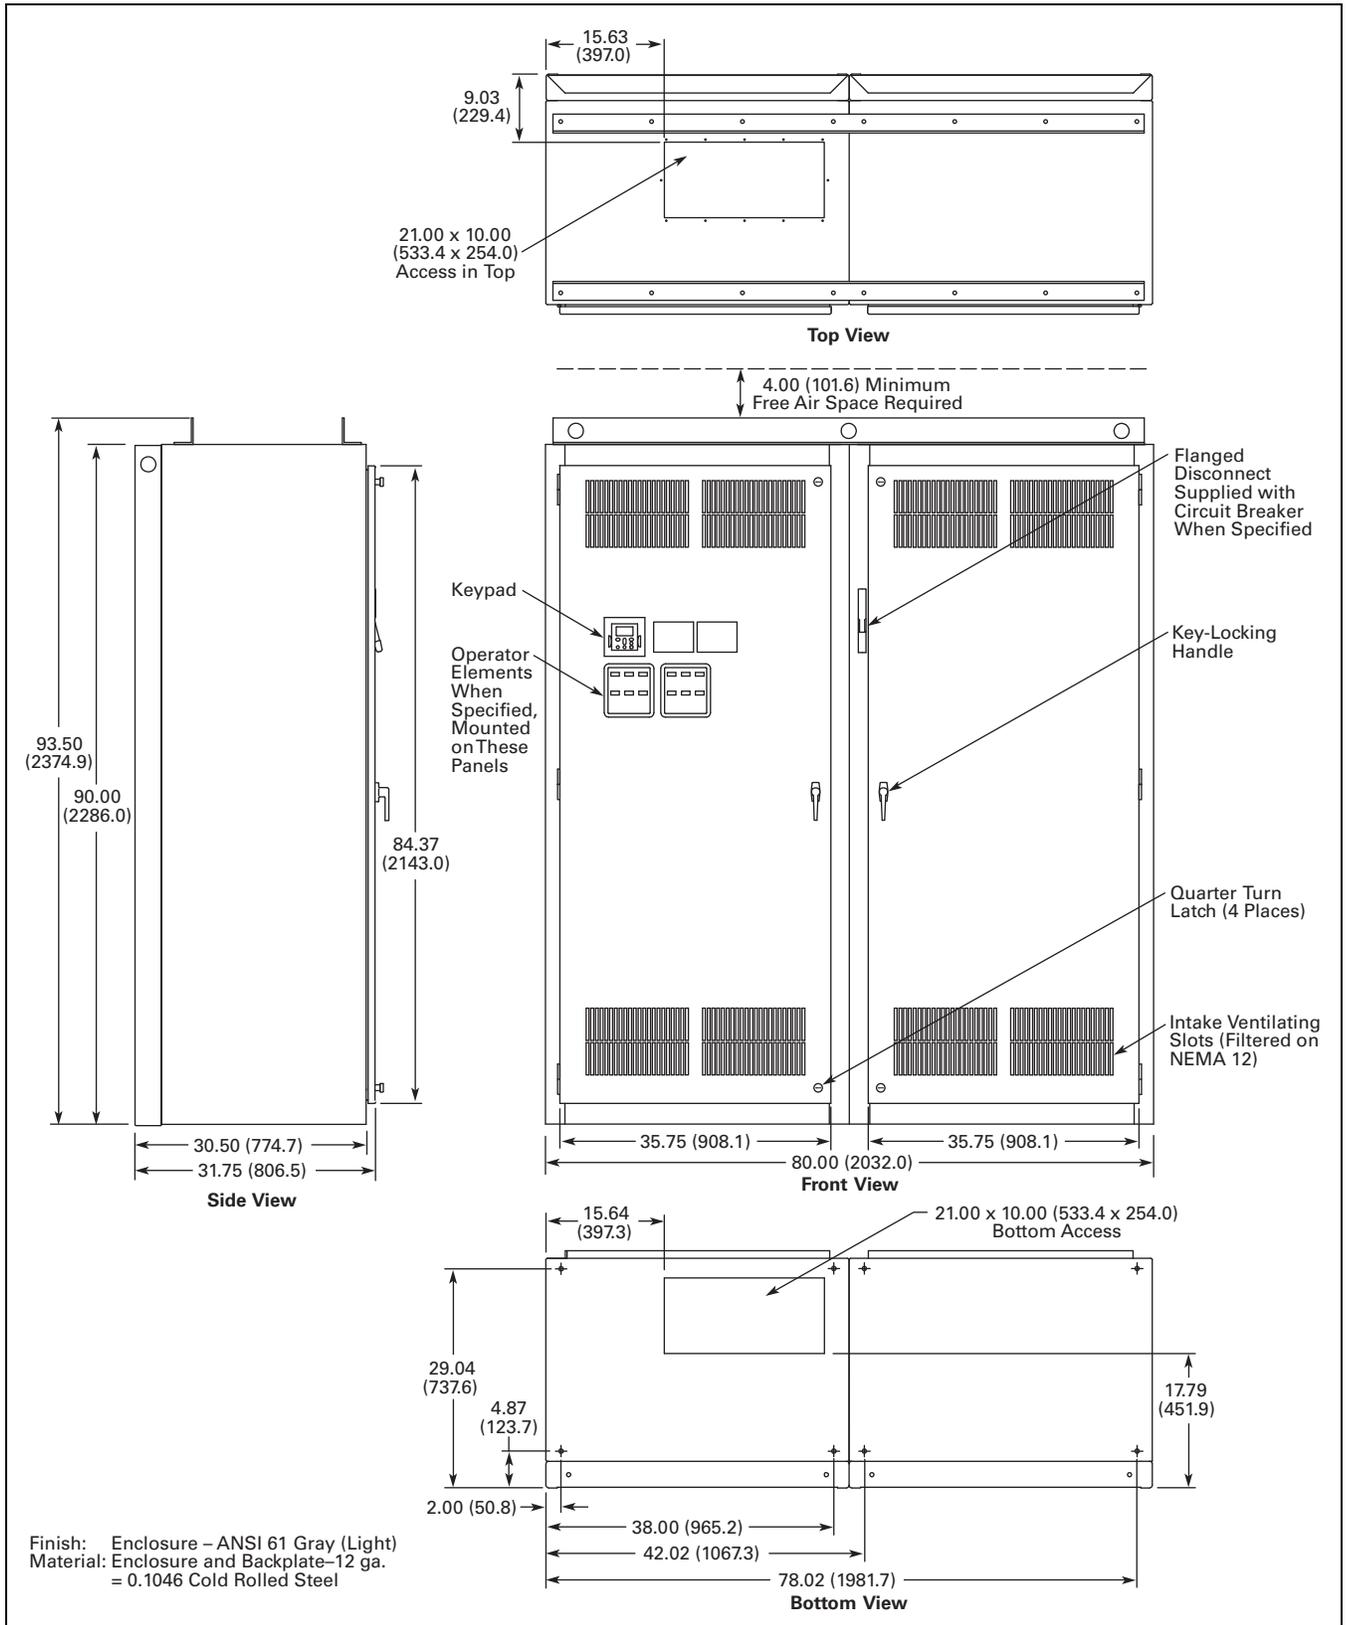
500–600 hp I_L and 400–500 hp I_H—Approximate Dimensions in Inches (mm)
